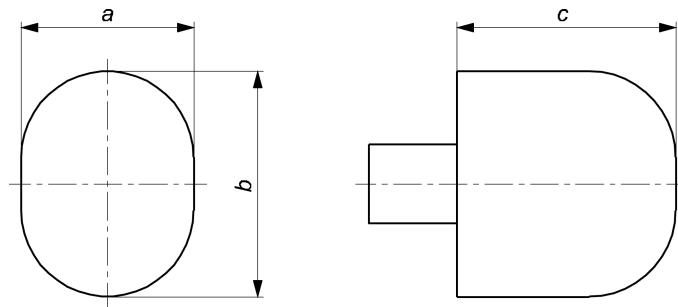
Finger probe for mesh5.3.3 Other probes
